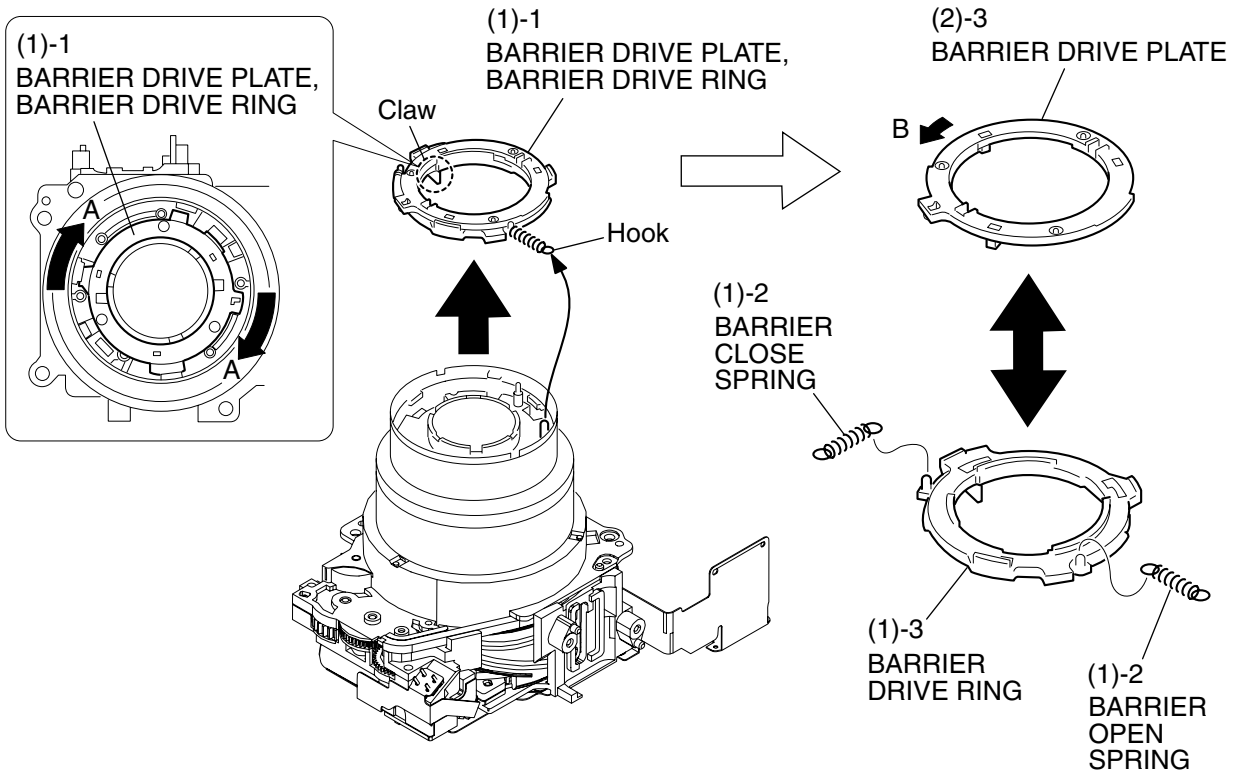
BARRIER DRIVE PLATE, BARRIER DRIVE RING
